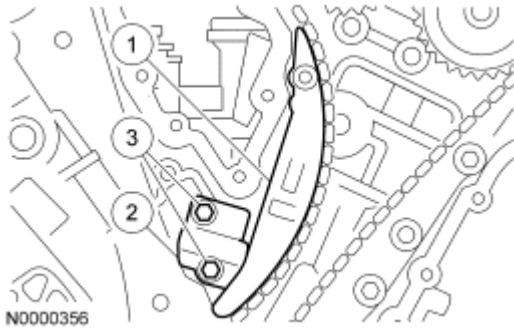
Identifying Timing Chain Tensioner Arm & Bolts
